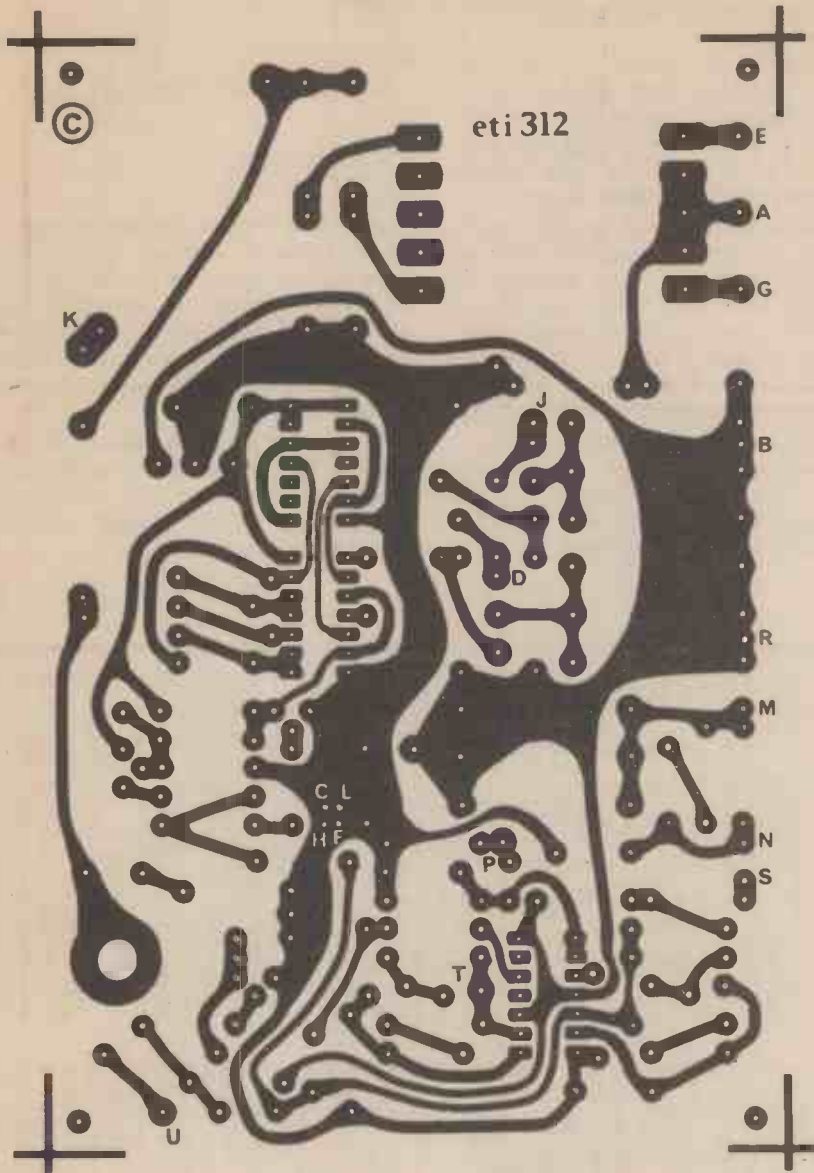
Printed circuit board layout. Full size 149 x 100 mm.
